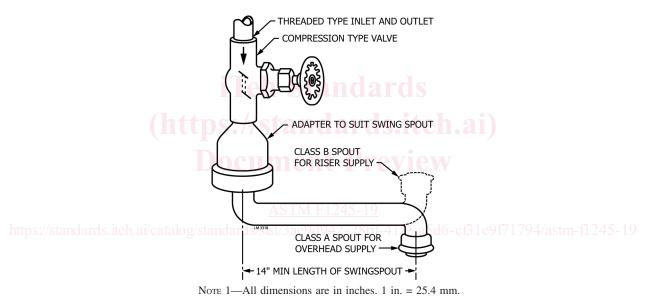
Type VII Faucet, Single-Supply Fixture Swing Spout for Use with Steam Kettles and Urns
